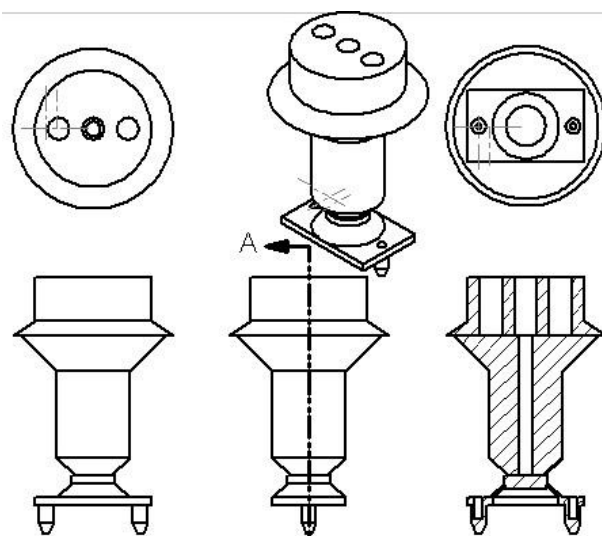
Assembly of the nozzle and the rubber key 2D.
